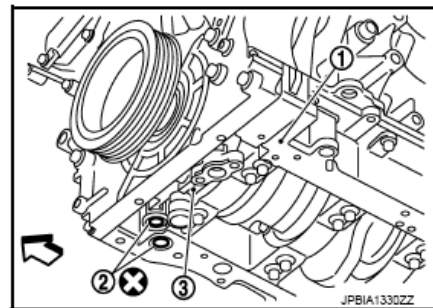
Identifying Lower Cylinder Block And Oil Pump O-Rings
